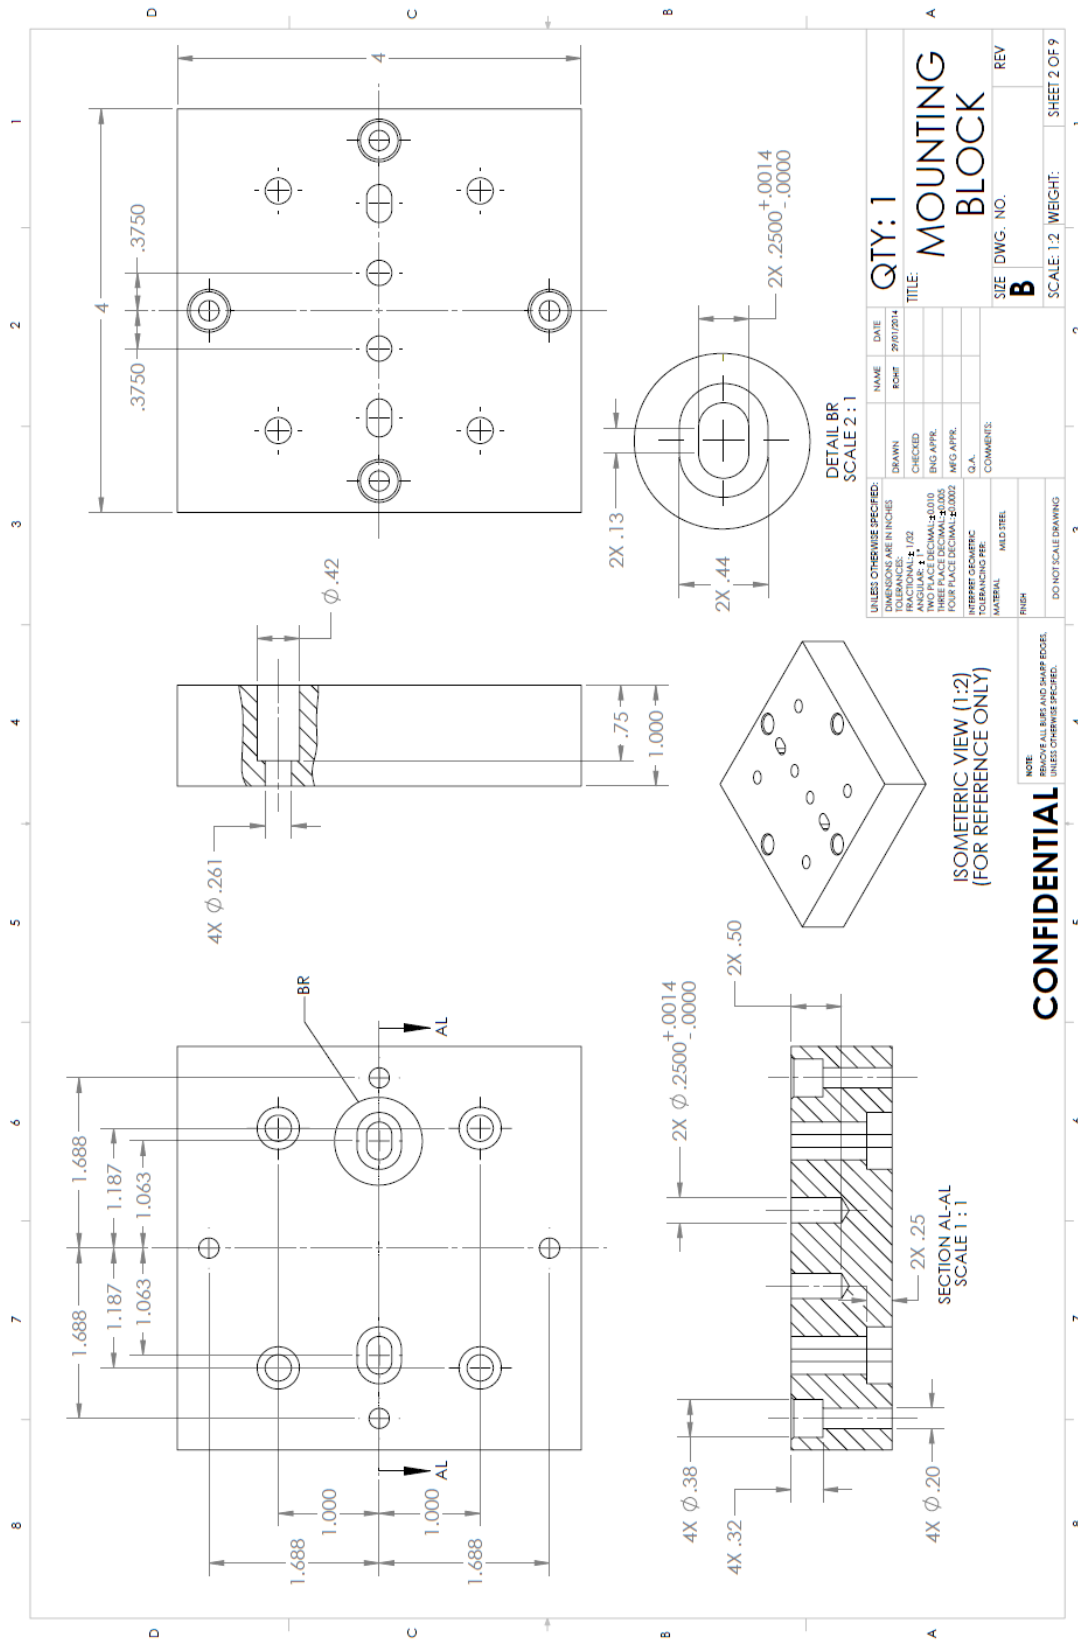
Detailed drawing of the mounting block used in the comprehensive springback study.
